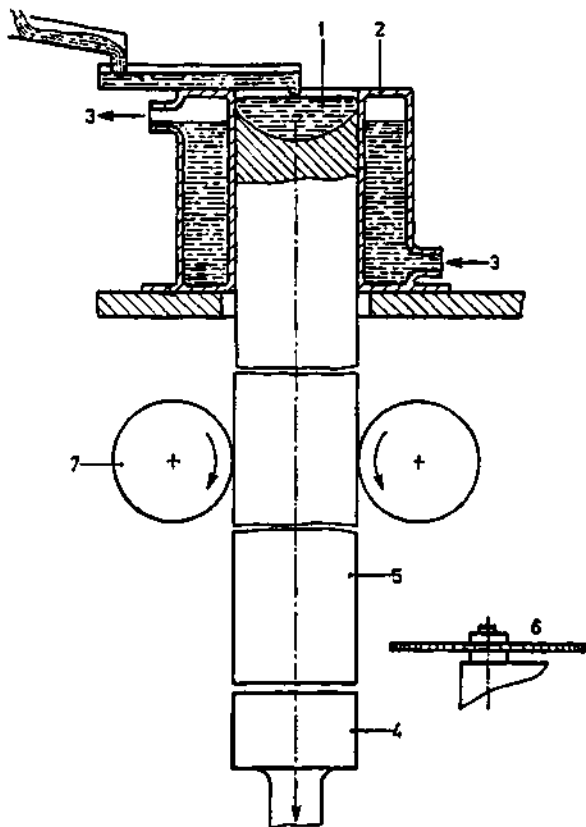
H Continuous casting of a solid bar with a vertical continuous casting machine. 1) molten metal, 2) water-cooled mold, 3) cooling water inlet and outlet, 4) (not shown) movable mold base which descends at a controlled rate to start the operation, 5) cast bar, 6) flying cutoff saw, 7) rollers to control movement of the cast bar. (from Davidson, Handbook of Precision Engineering, McGraw-Hill, New York)
